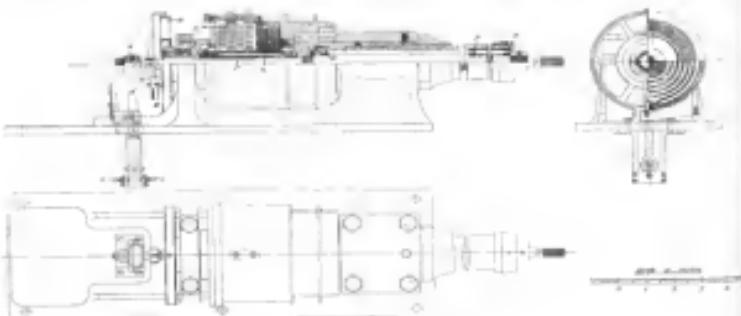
PROPELLER DYNAMOMETER—SECTION
